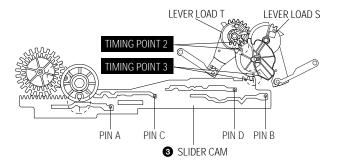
Gear Loading Drive, Slider Cam, Lever Load S, T Ass'y Assembly
